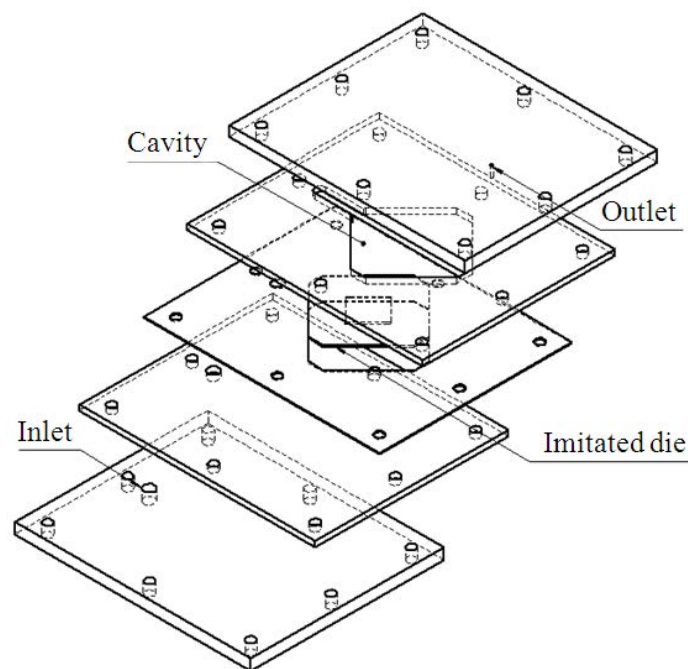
Exploded views of the mould of scale-up eight-wire PBGA model with corner inlet. (Layer 1: top plate, Layer 2: cavity plate, Layer 3 - 5 base plates with inlet).
